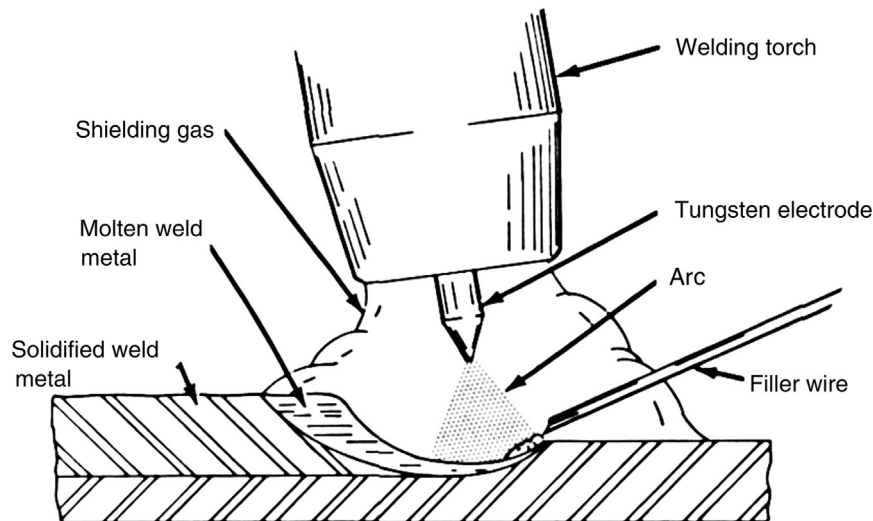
Gas tungsten arc welding (GTAW). The weld is produced by heating with an arc between a single tungsten (nonconsumable) electrode and the work. Shielding is obtained from an inert gas mixture. No weld spatter or slag is produced. This process is sometimes referred to as tungsten inert gas (TIG) welding. The diagram is used by permission courtesy of Hobart Brothers Company. Technical Section. In *Pocket Welding Guide*, Troy, OH, 1997, pp 108–138.
